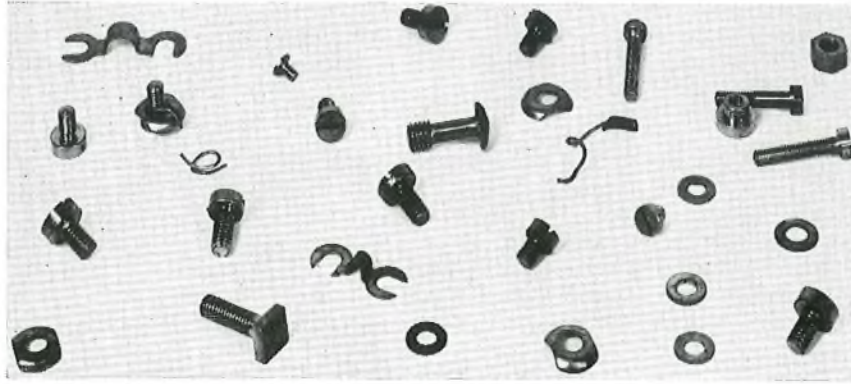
TYPICAL RANGE OF PARTS LIKELY TO BE FED INTO MACHINE
